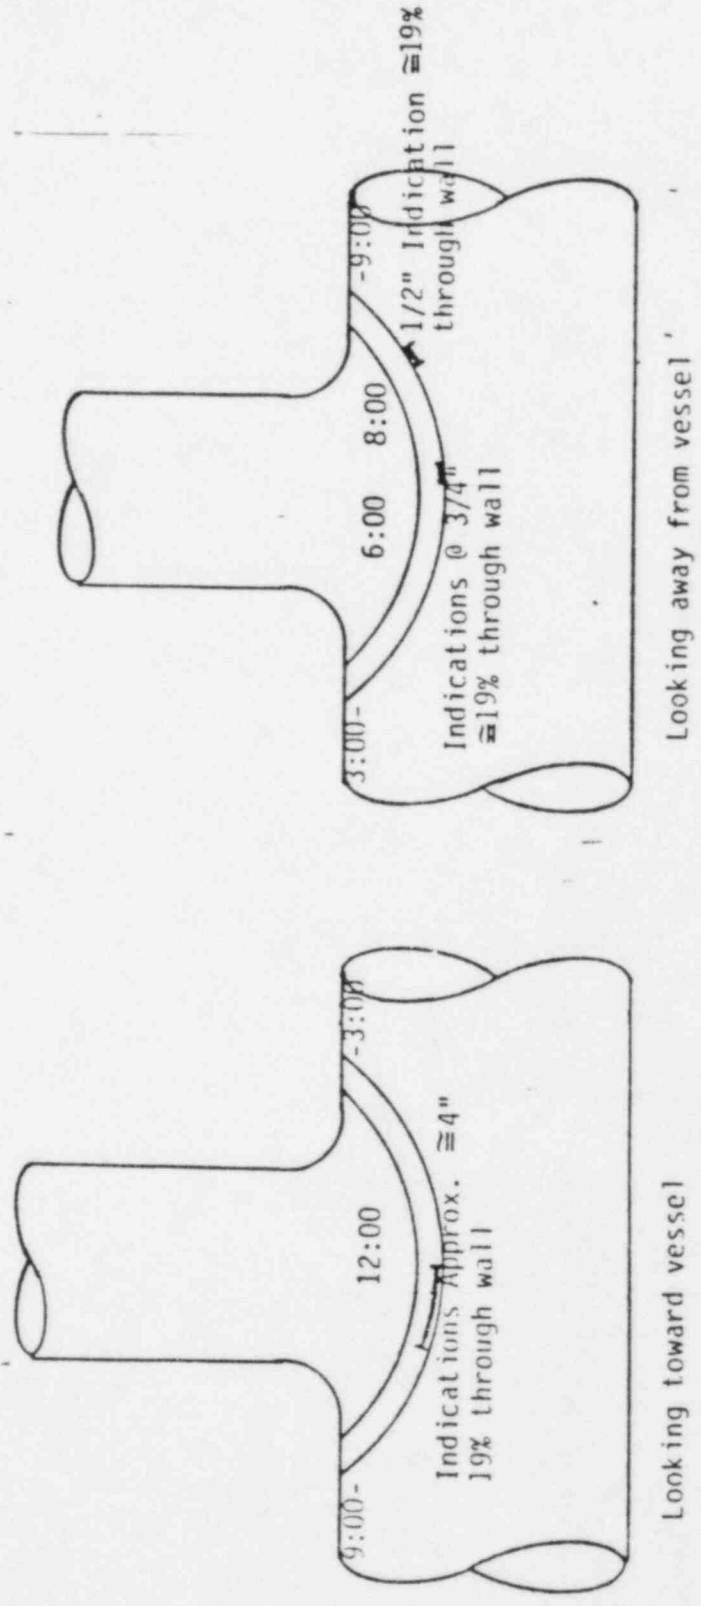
Flaw Indications in Weld KR-2-41
